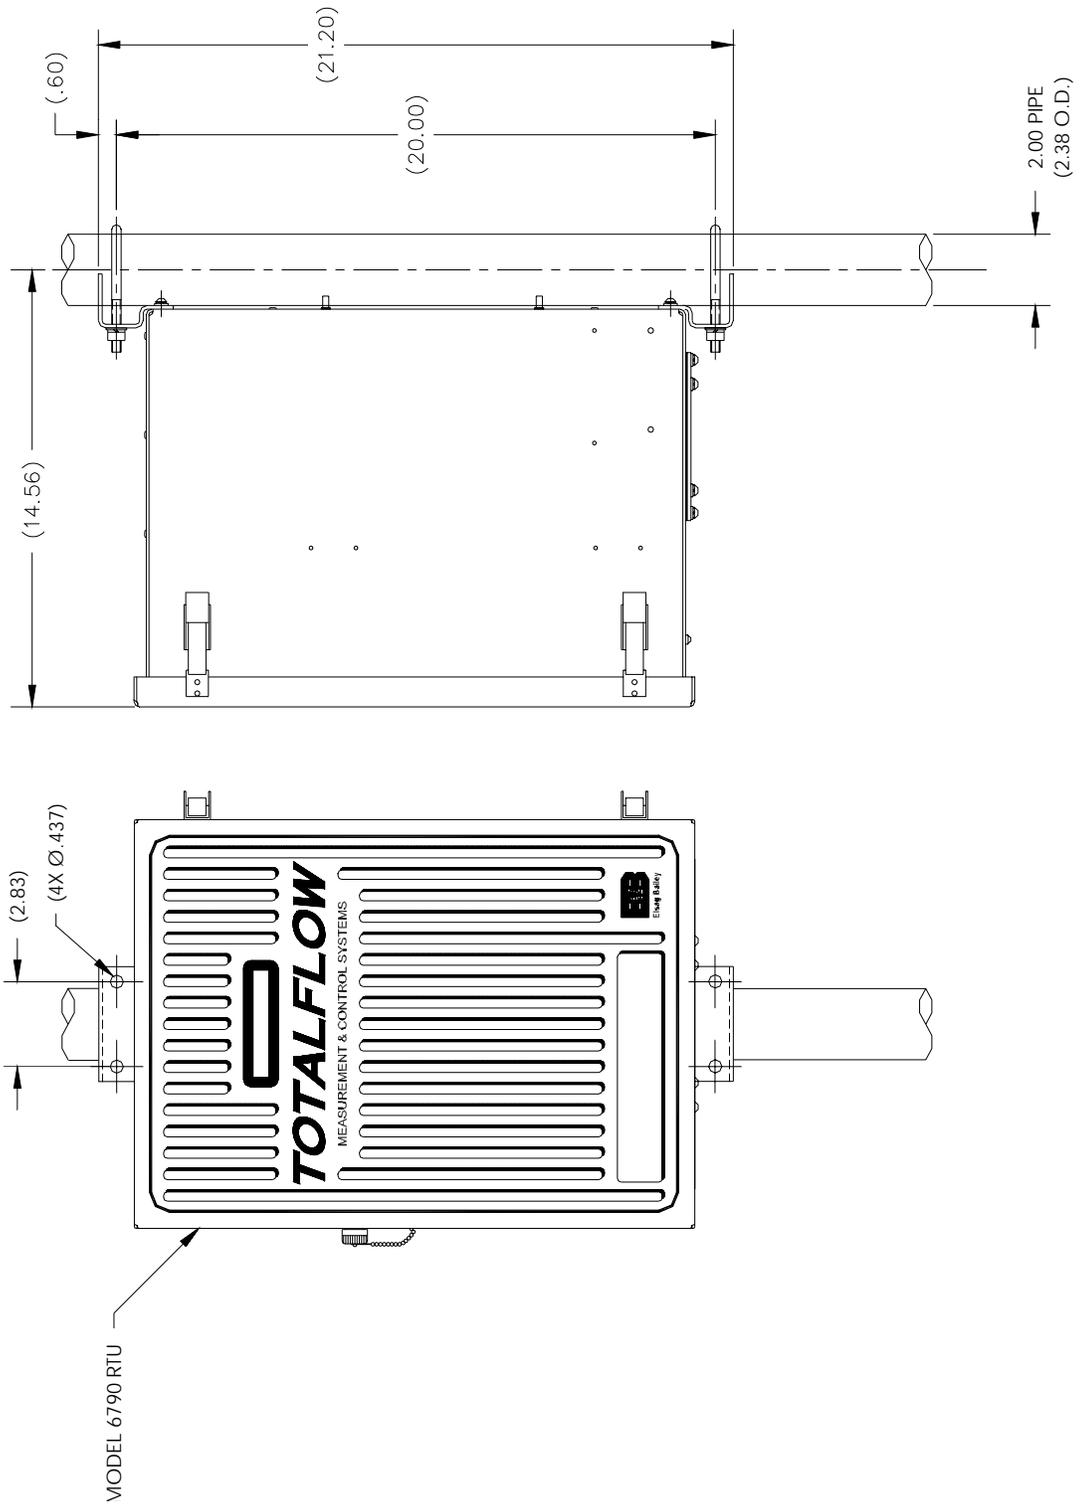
3 Pole Mounting Dimension Drawing, Model 6790 RTU
